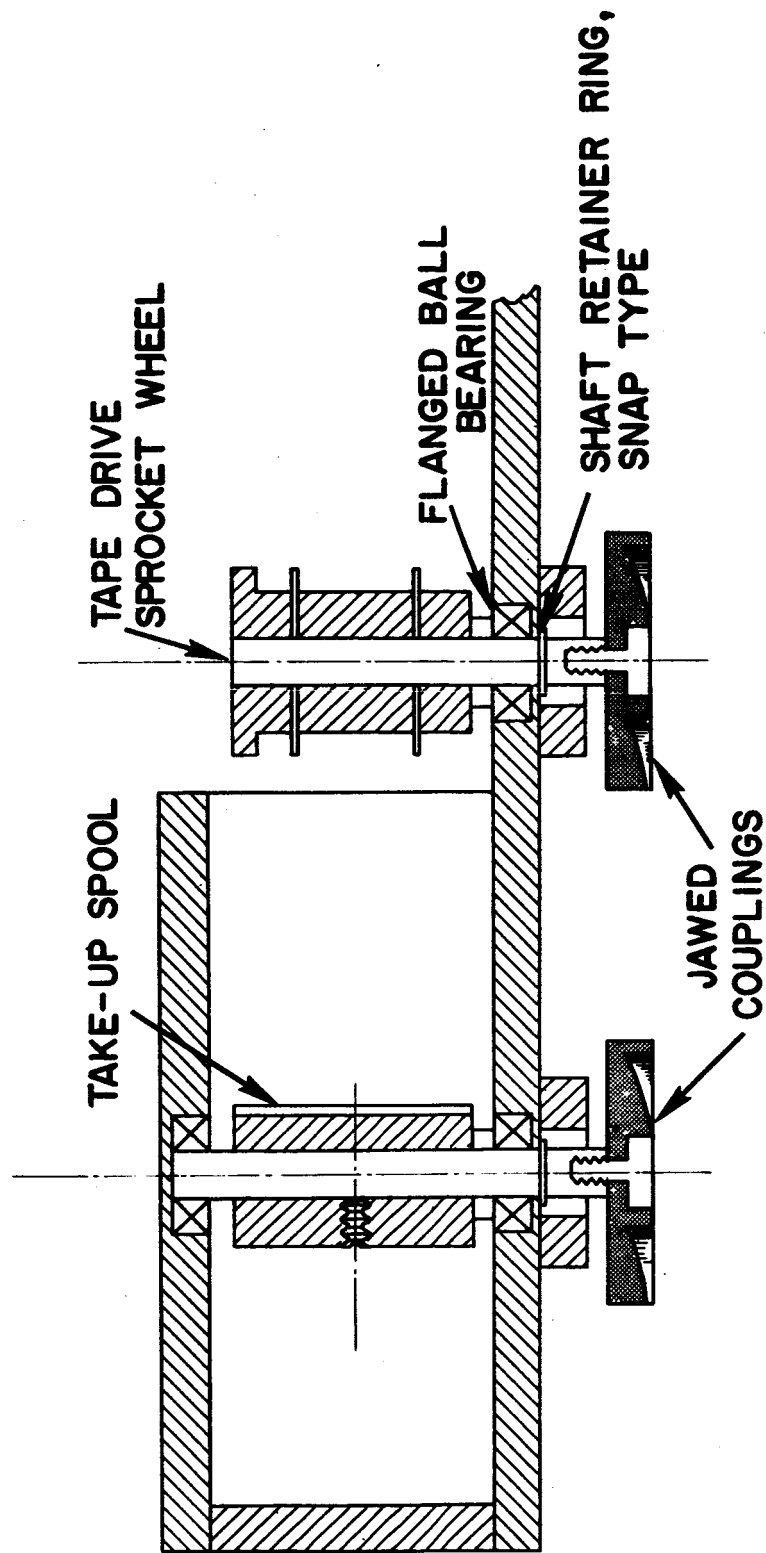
Cross-Section of Tape Transfer Drive and Takeup Spool
